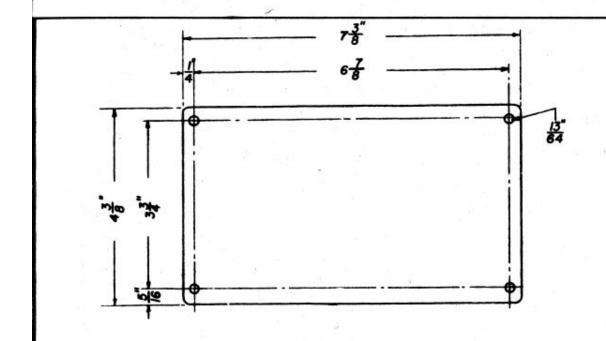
DYNAMOTOR BASE PLATE OUTLINE DIMENSIONS
